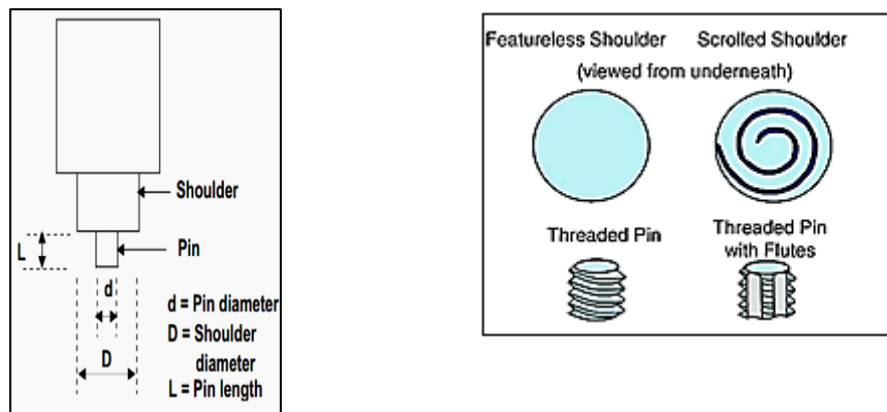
SCHEMATIC DRAWING OF FSW TOOL [2]
